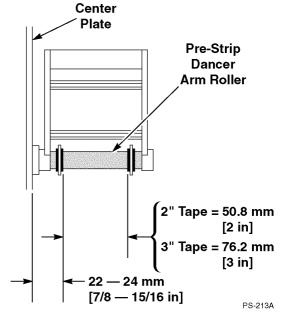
Tape Tracking Adjustment on Pre-Strip Dancer Arm Roller (Left-Hand Applicator Shown)
